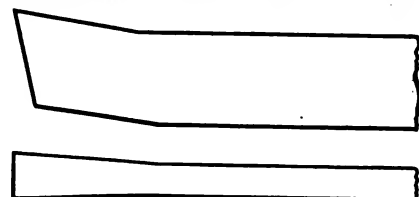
SHOWING THE SHAPE OF THE CUTTING-OFF TOOL
